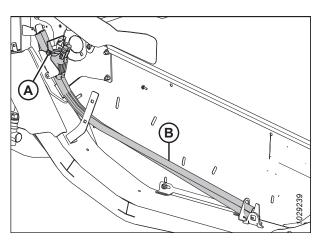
Divider Rods in Shipping Storage at Right Header Endsheet
